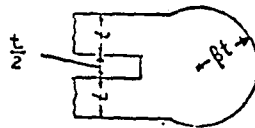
"PARALLEL" WELD DESIGN
